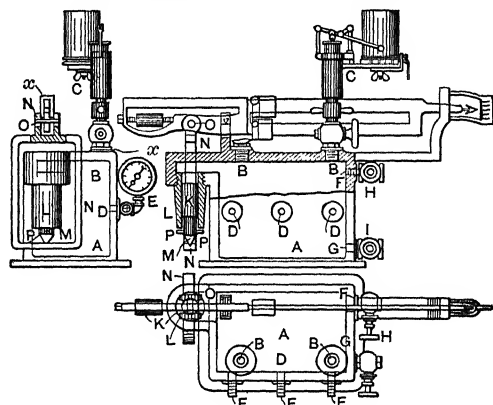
INDICATOR-SPRING TESTING APPARATUS.
